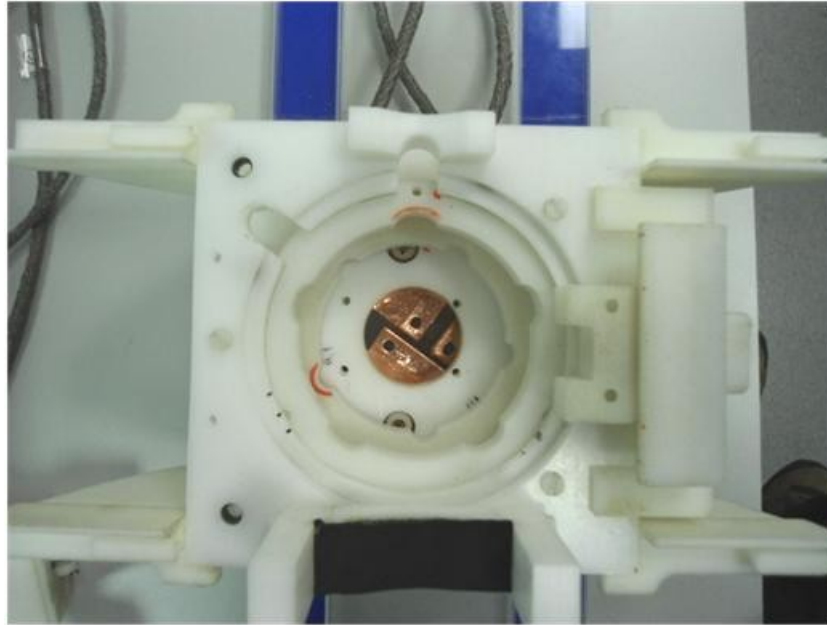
Top view of left hand module prototype, showing large helical gear with central cutouts for endoscope tip steering wheels
